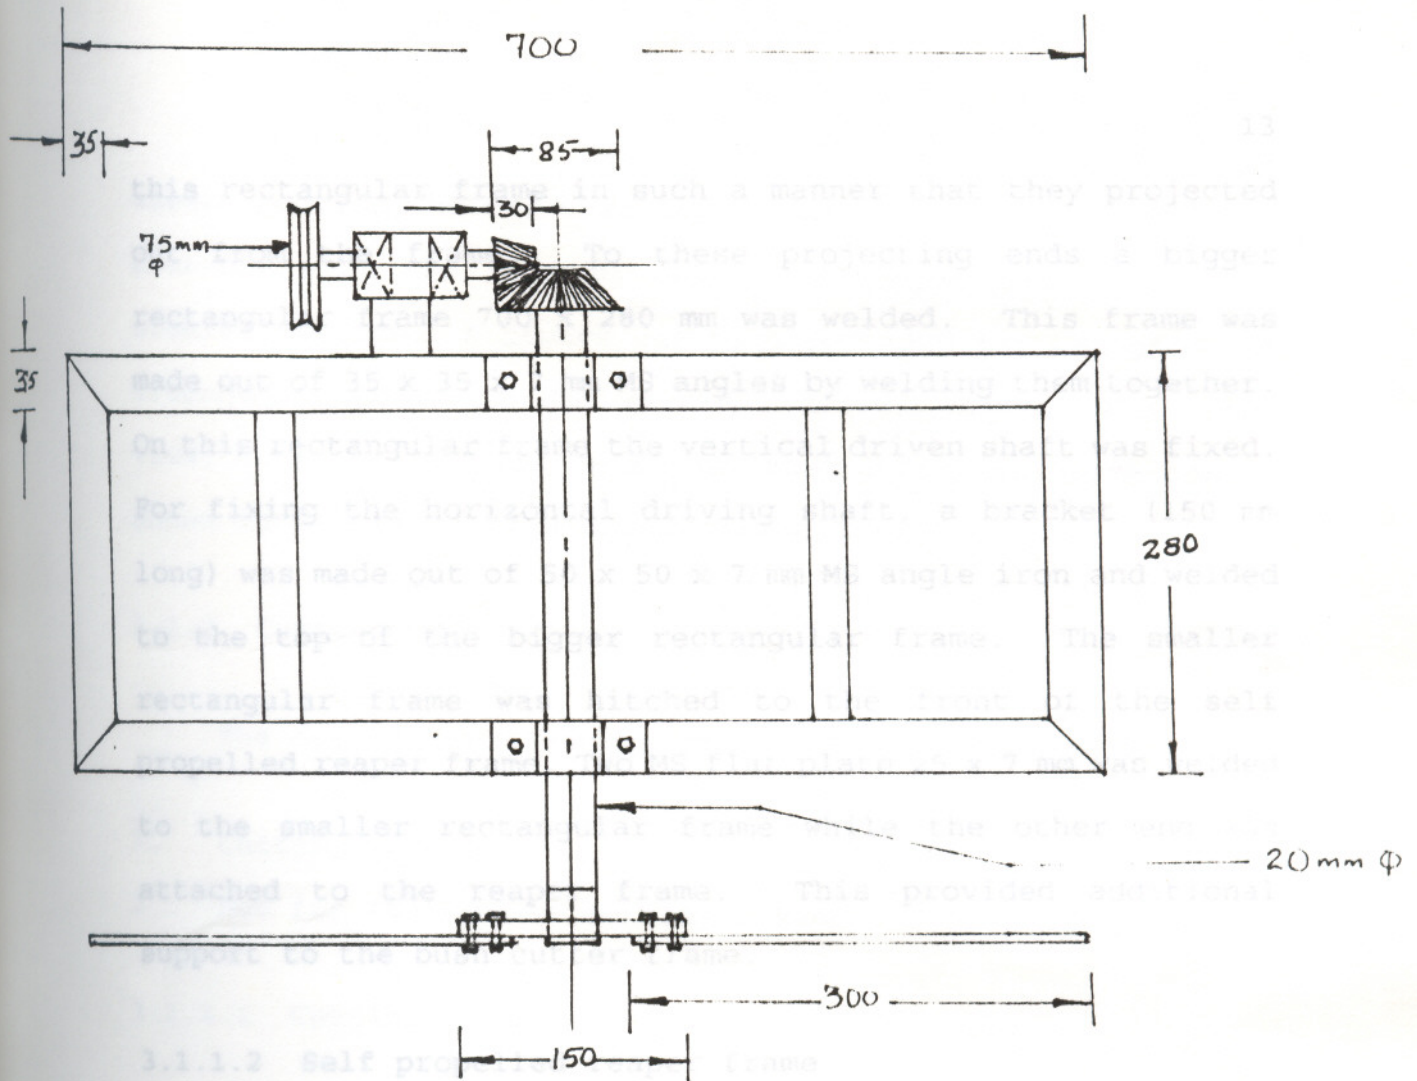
(b) FRONT VIEW OF THE BUSH CUTTER
